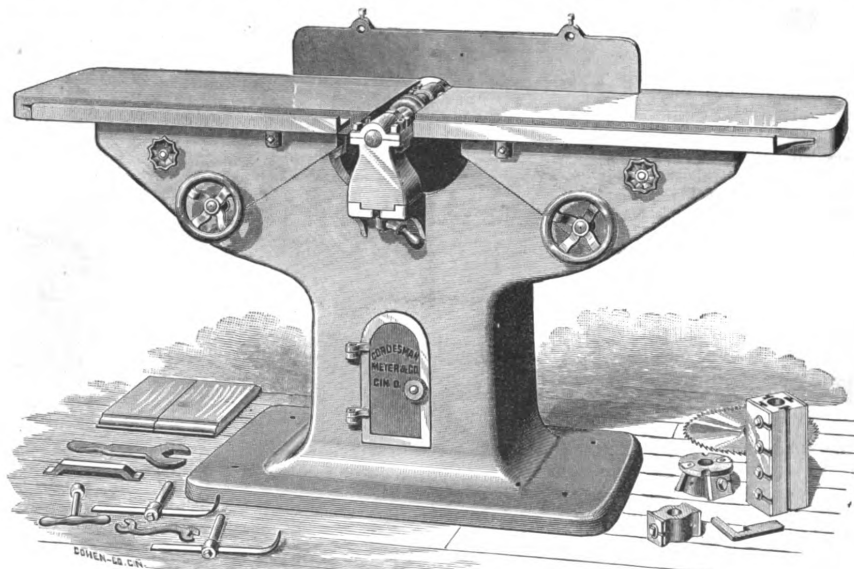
Improved Universal Wood-Worker, Made by Cordesman, Meyer & Co.
